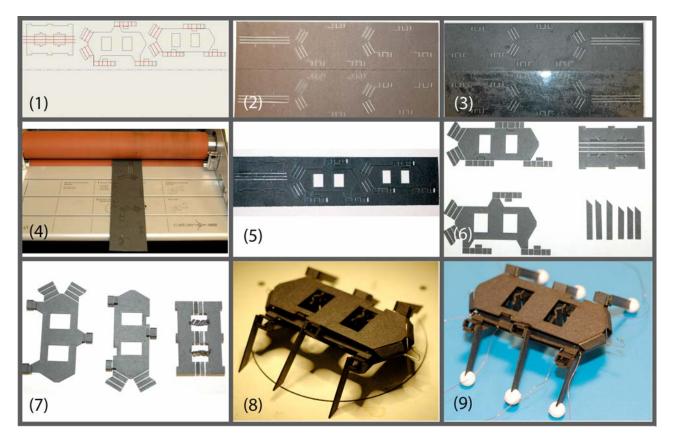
Steps for prototyping a hexapod crawling robot: (1) A 2-dimensional drawing is made in a vector-based illustration program (we use Solidworks). (2) A blank piece of posterboard with a pre-cut fold line is folded and placed in a laser cutter, and the flexure cuts are made in both layers. (3) The workpiece is removed and adhesive is applied to both sides inside the fold. A 50μ m film of PET is sandwiched between the two sides of the fold. (4) The workpiece is fed through heated rollers at 230° F at a low speed (approx. 5mm/sec). (5) The workpiece is placed back in the laser cutter and outlines of the parts are cut out. (6) Parts are released from the workpiece. (7) Individual linkages can be folded up in place. The three joints on the two leftmost pieces are fourbars used as hips. The joints in the rightmost piece form two Sarrus linkages when two are folded and glued out of plane. (8) The three plates are joined such that the hips for one tripod sit above the central plate while the hips for the other sit below, and the legs are attached to the hip fourbars. (9) SMA actuators are attached and wired in place and spherical PDMS feet are added.
